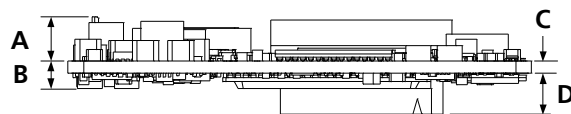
FETK-T3.0 Dimensions - Side View
